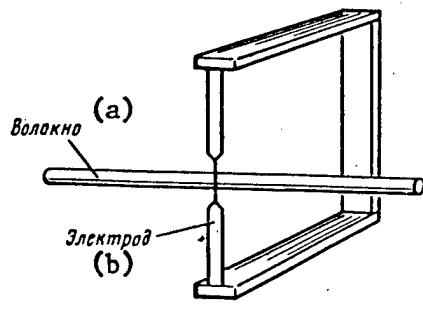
Electrical arc welding of fibers. a - fiber; b - electrode.
